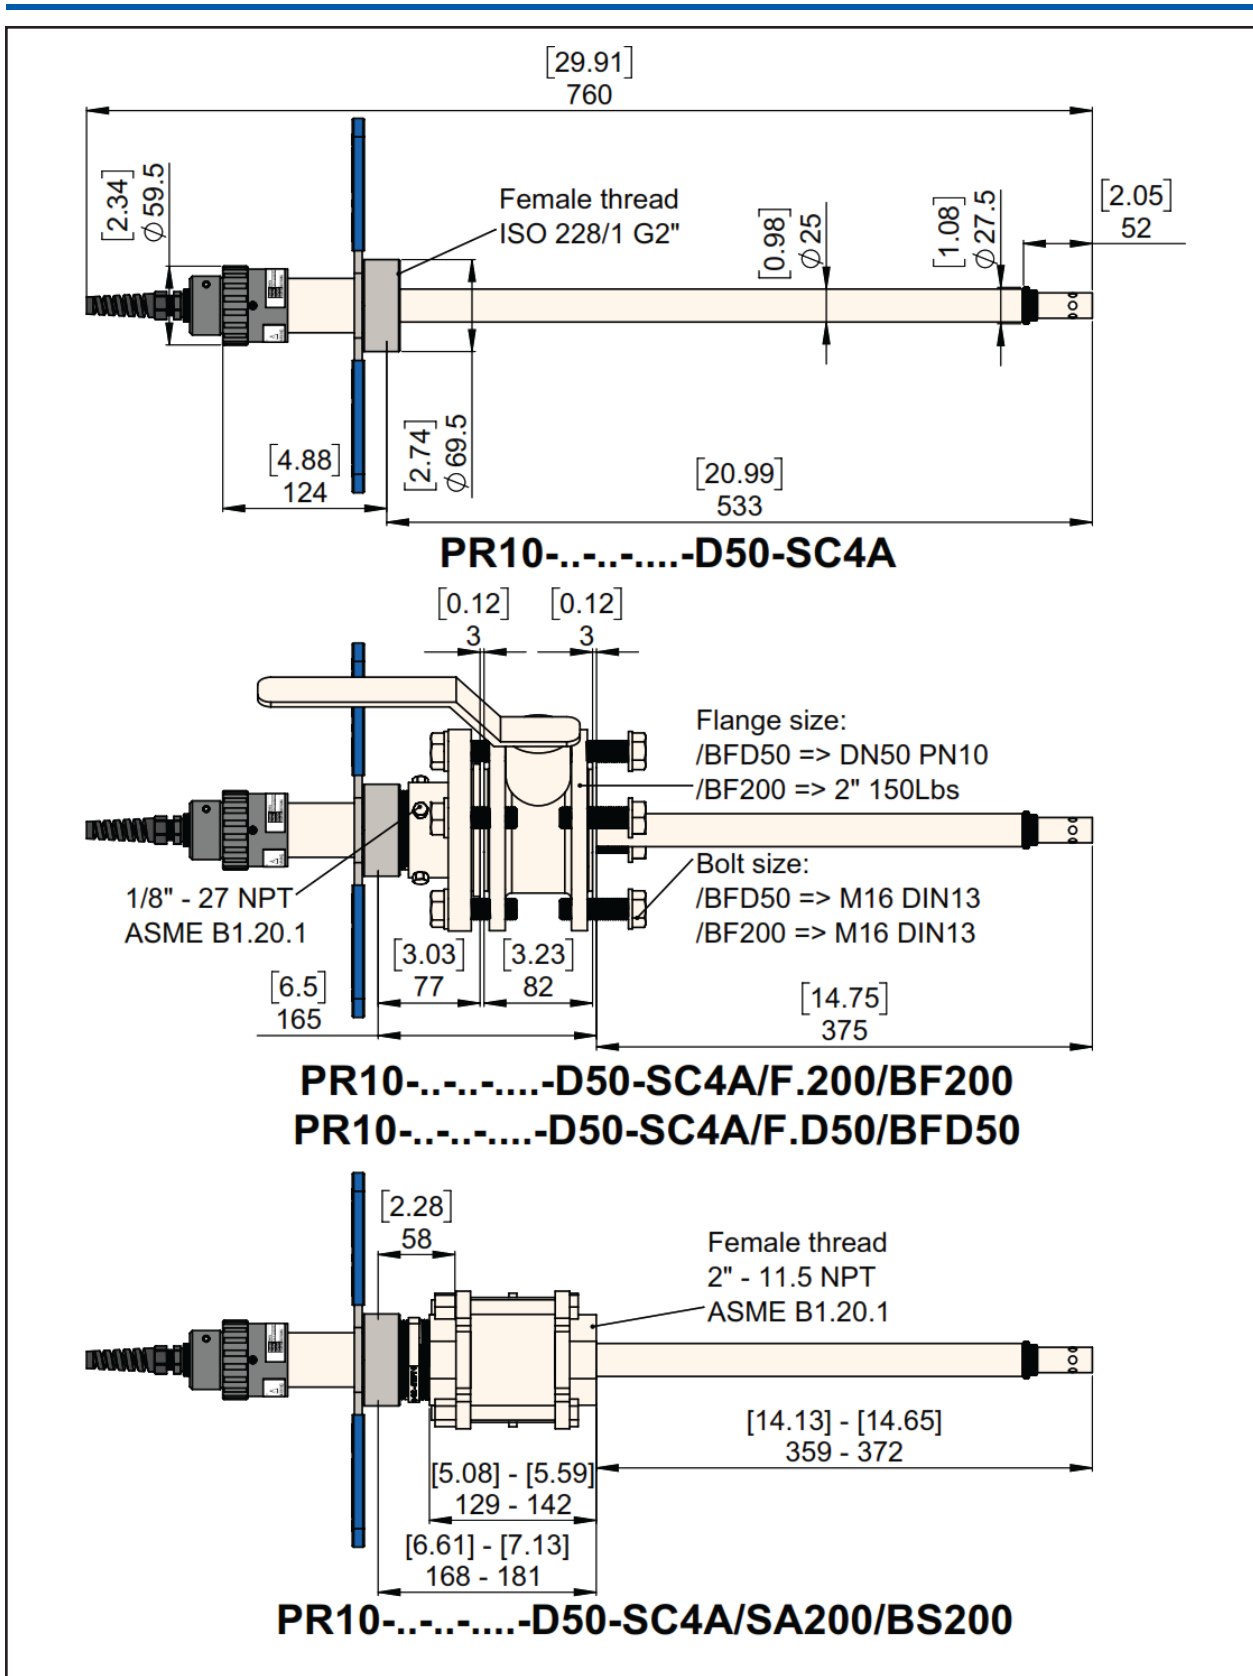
Dimensional drawing PR10...-D50 with mounted SC4A sensor - units in mm [inch]
